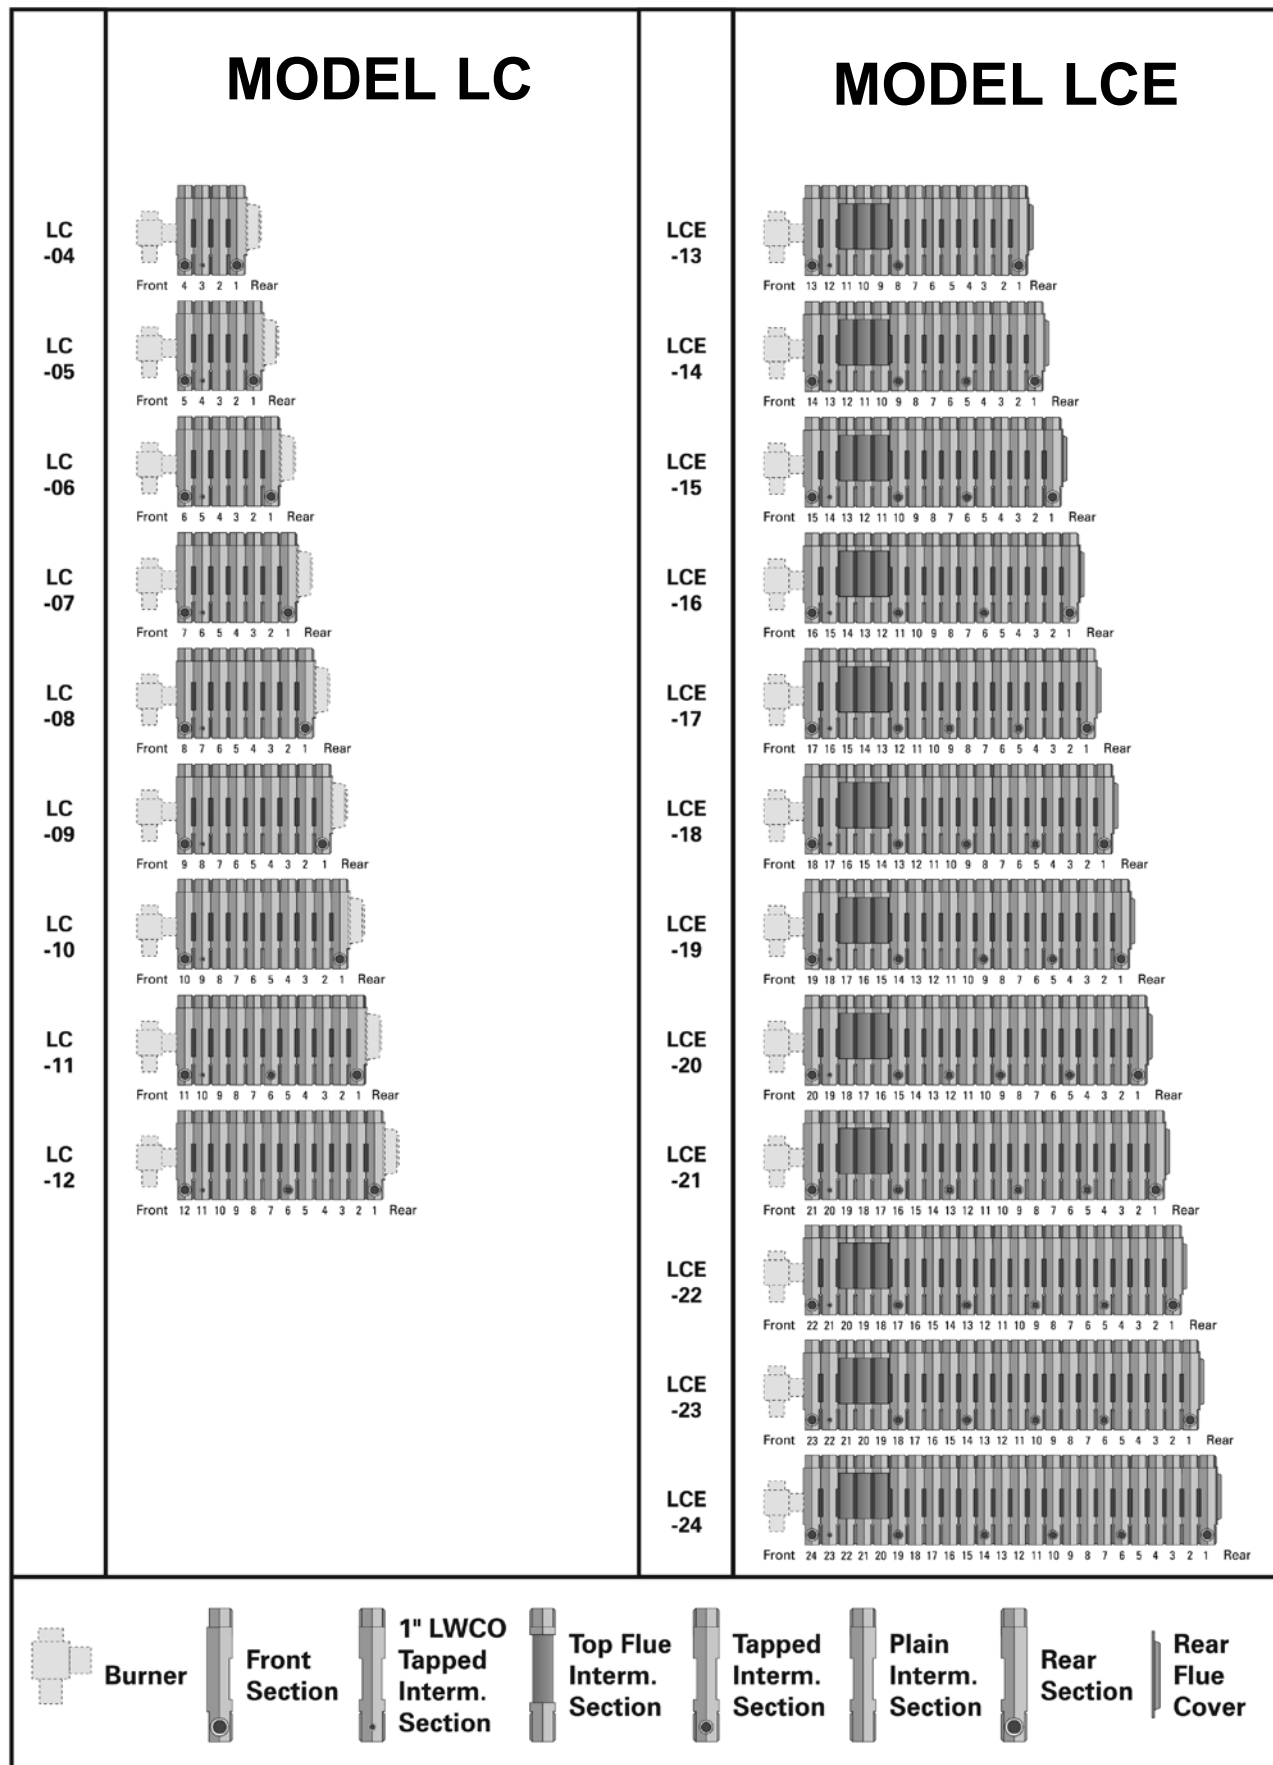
LC/LCE Boiler Section Assembly Sequence
